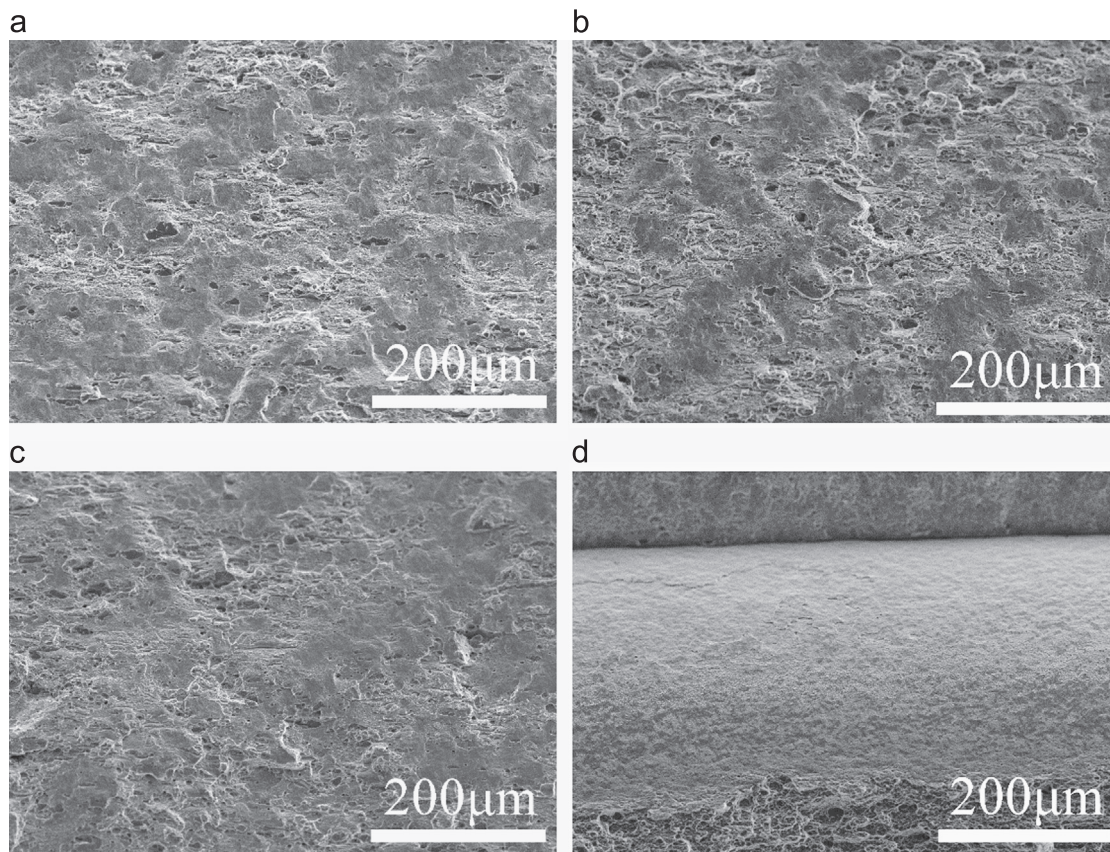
Fracture surfaces of the tensile samples for the as-welded joint (a), and joints with DCT (b), DCA (c) and LTA (d).
